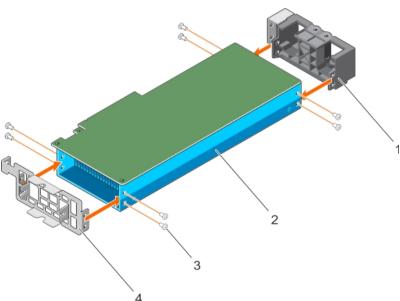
Installing the custom Intel GPU I/O brackets and the support brackets
